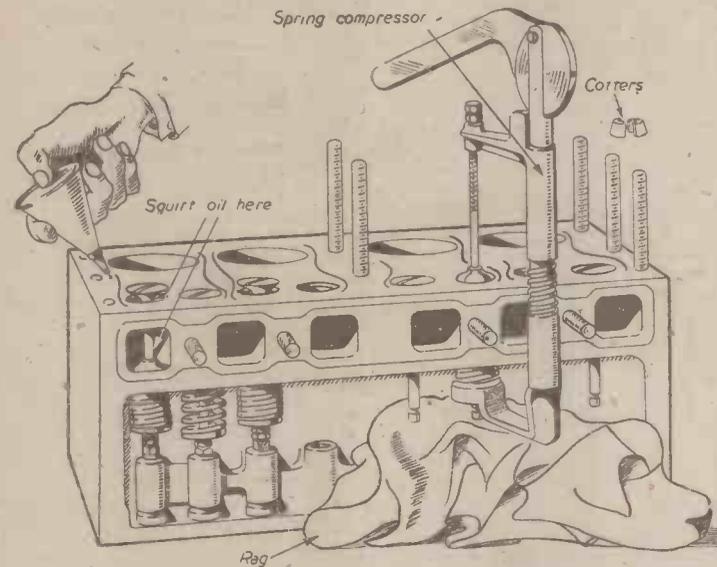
This illustration of a partly dismantled four-cylinder side-valve engine shows how stuck valves may be loosened in their guides by injecting penetrating oil round their stems and near the ends of the valve guides. The illustration also shows a valve spring compressed prior to removal of the cotters; the rag is to "collect" any cotters that are dropped.
